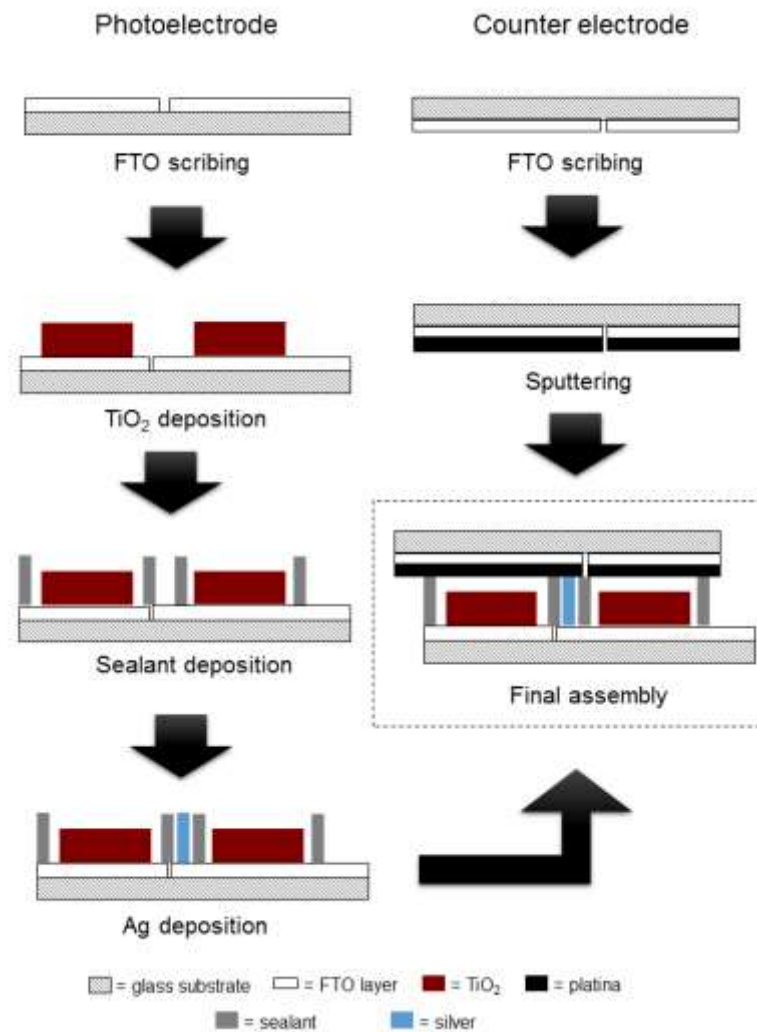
Schematic drawing of the assembly process of DSSC sub-modules.
